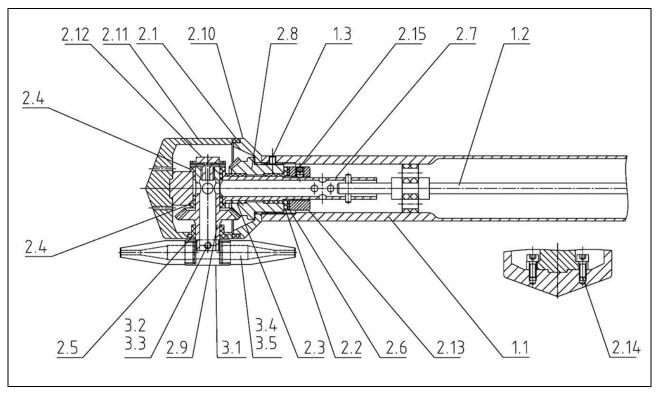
Cleaning Head with Individual Parts (Example TANKO-JX75)
